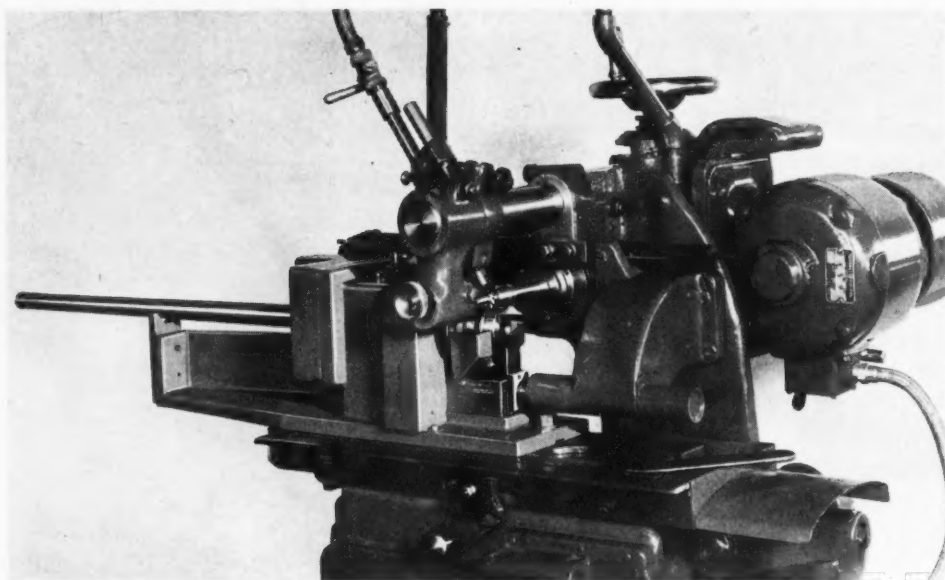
Set-up for Cutting Two Notches in a Machine-gun Barrel at Each Indexing
